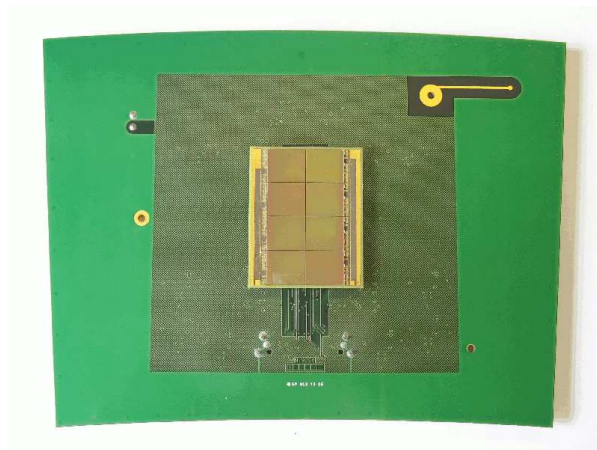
Octopuce module for the LCTPC prototype. Aluminium frame, mother PCB, daughter PCB and guard plate.
